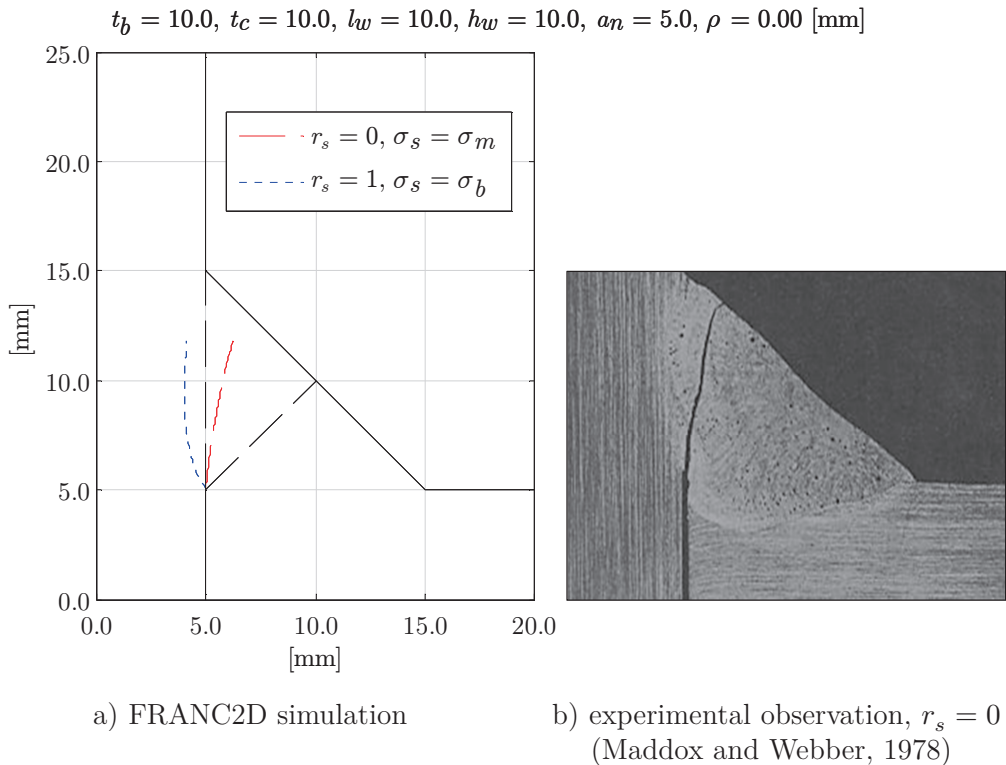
PP DS cruciform joint weld root crack path similarity.
